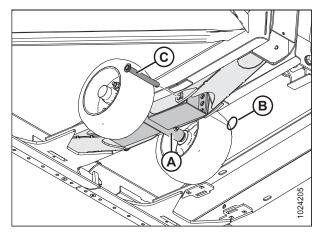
Inboard Wheel Assembly and Left Header Leg – View from Below, Right Opposite
